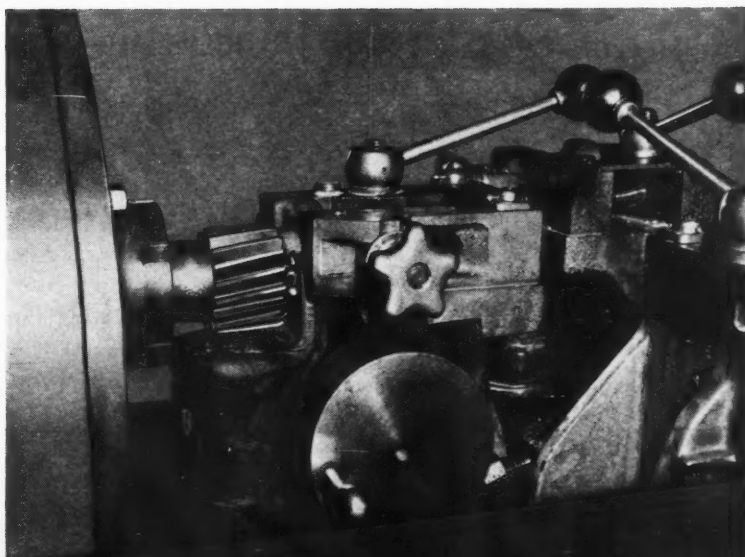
The upper and lower cam locking surfaces on cast malleable-iron steam couplings are form-milled on the duplex eccentric milling machine seen in the heading illustration
